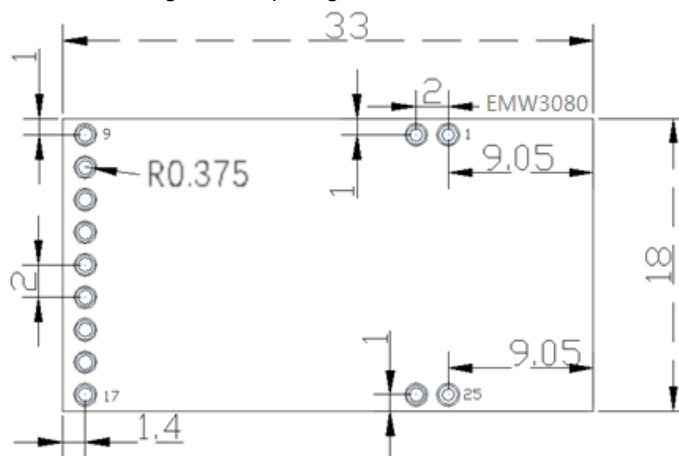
Stamp hole package size (mounting pad, unit: mm)
